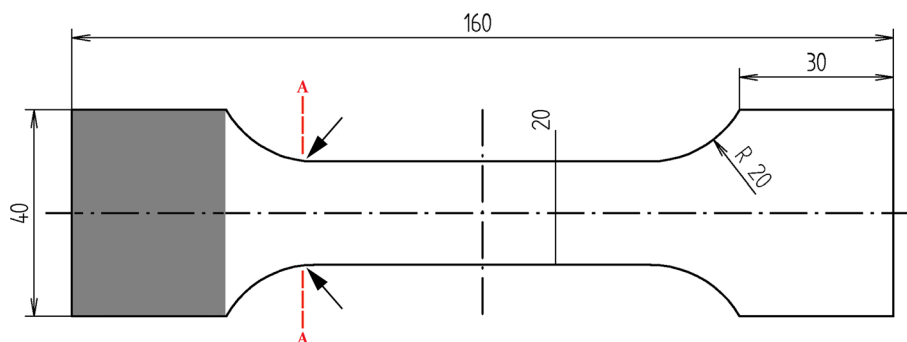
Geometry of the fatigue test specimens. Arrows indicate crack initiation sites, gray area represents cantilever clamping area, A-A section shows the orientation of sample fracture surfaces
